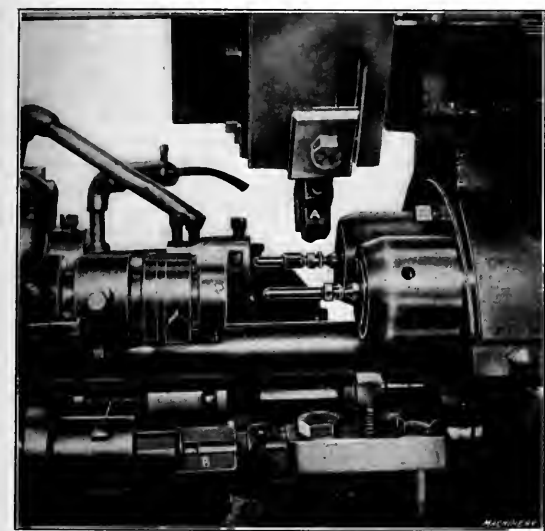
The "Set-up" used for producing the Cone-headed Screw shown in Fig. 11
